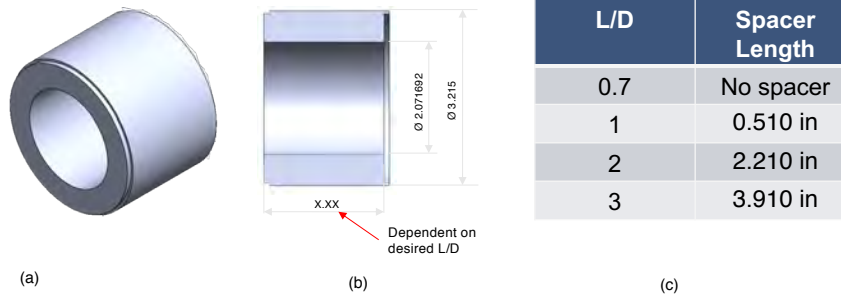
Exhaust nozzle (a) isometric view and (b) dimensioned cross section view (all dimensions are in inches) and (c) spacer length as a function of desired L/D
